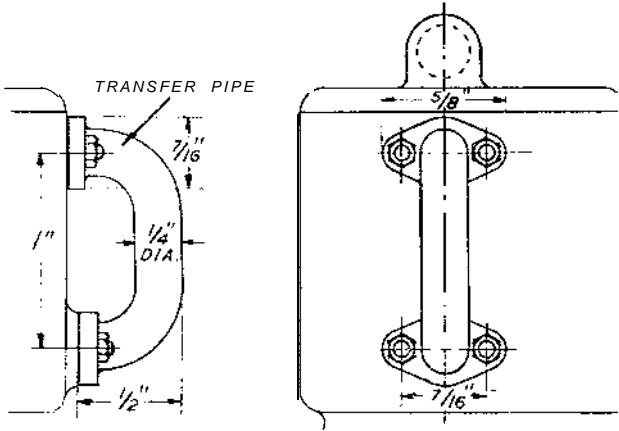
Showing how a transfer pipe may be fitted to communicate between water jackets in main and cylinder-head blocks
